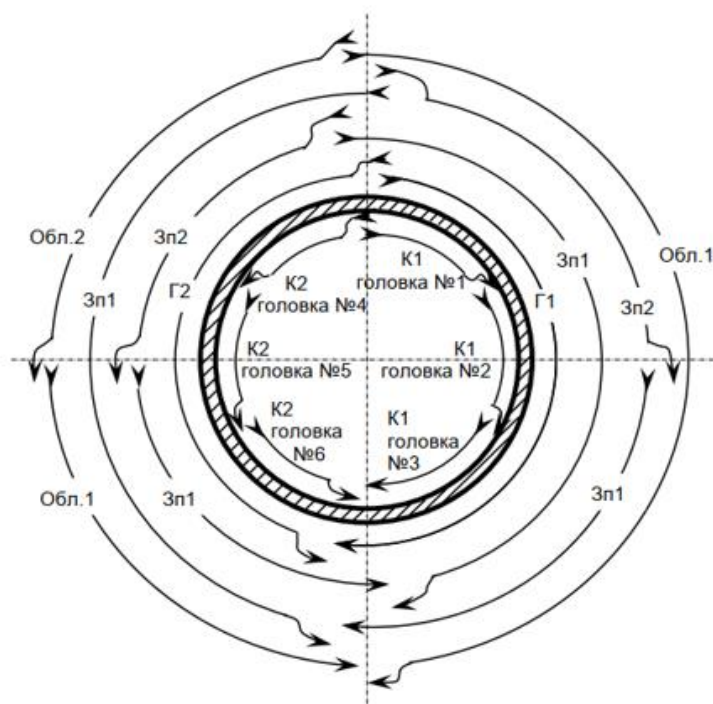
Scheme of automatic two-sided welding of nonrotating circular butt joints of pipes
